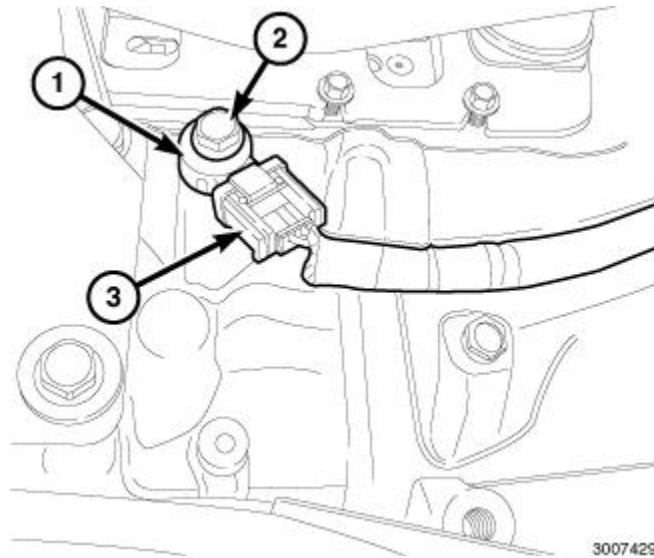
Knock Sensor, Electrical Connector & Bolt
